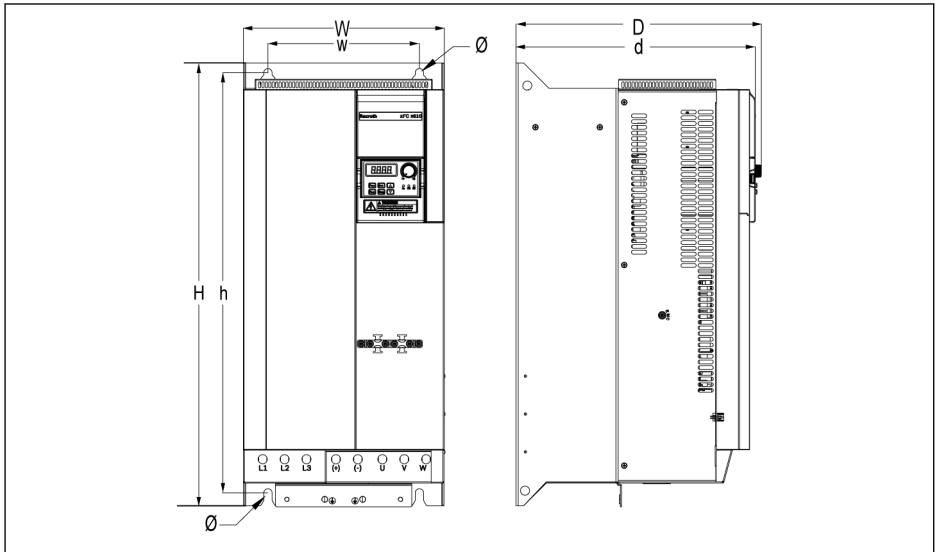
EFC 5610 45K0...55K0 dimensions figure (3P 380 VAC)
